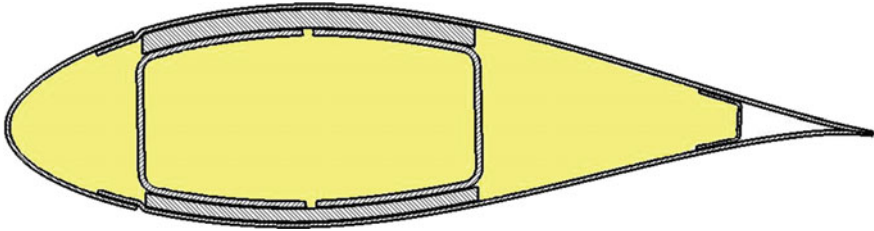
MW scale, variable pitch blade section—earlier example for proof of concept machines
